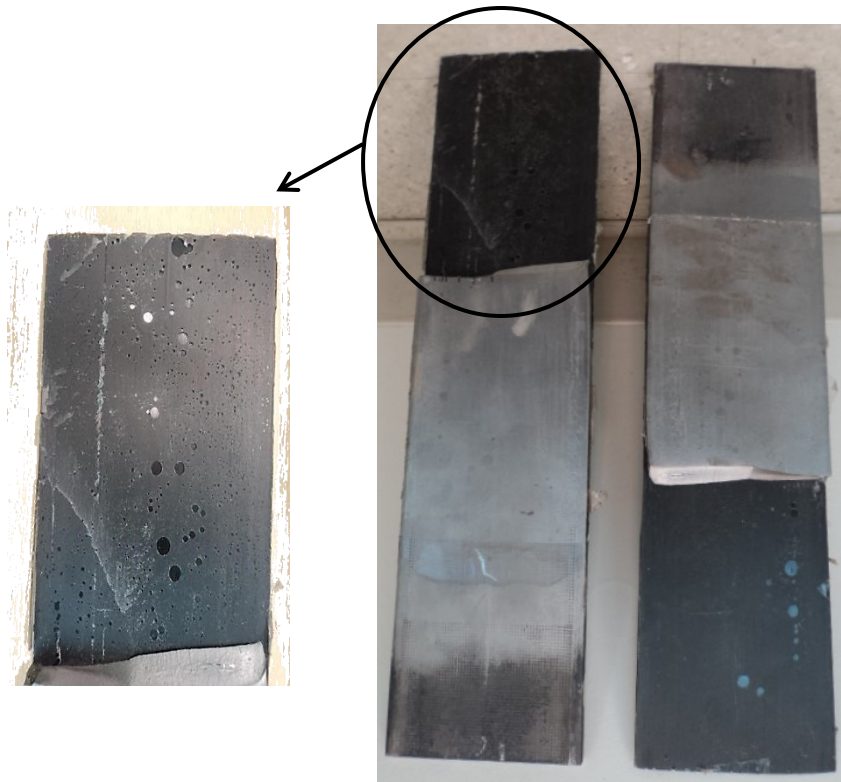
Delaminated CFRP surface showing air bubbles marks and the failed specimen 1CBDR-Sk-300
